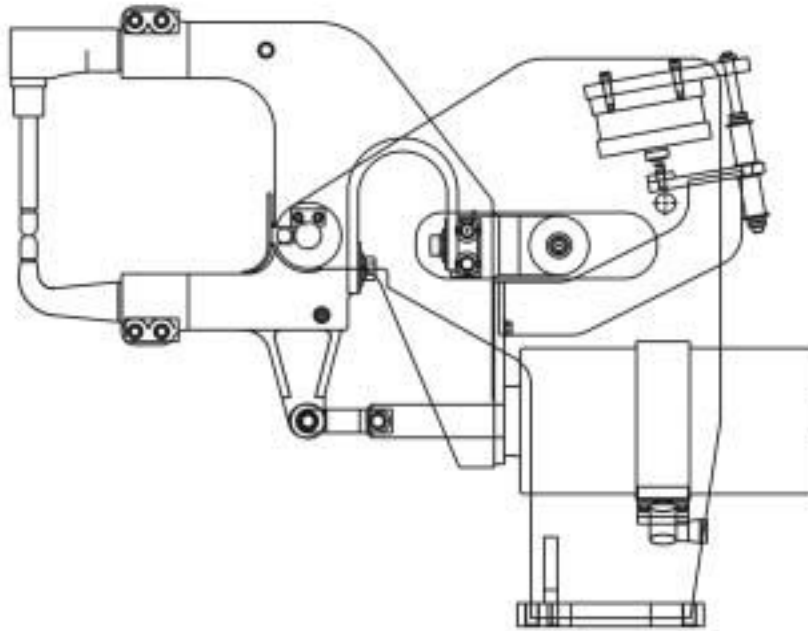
Robot Style, Pinch-Type Gun wo/Transformer
